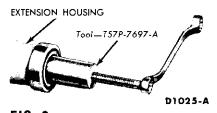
Extension Housing Bushing and Rear Seal Removal
